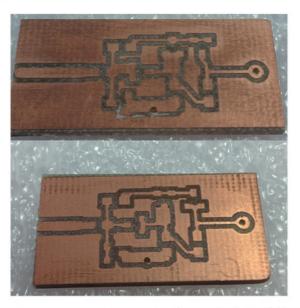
PCB with tracks Milled and Isolated (Top:HSMS-2820) (Bottom:HSMS-2850)
